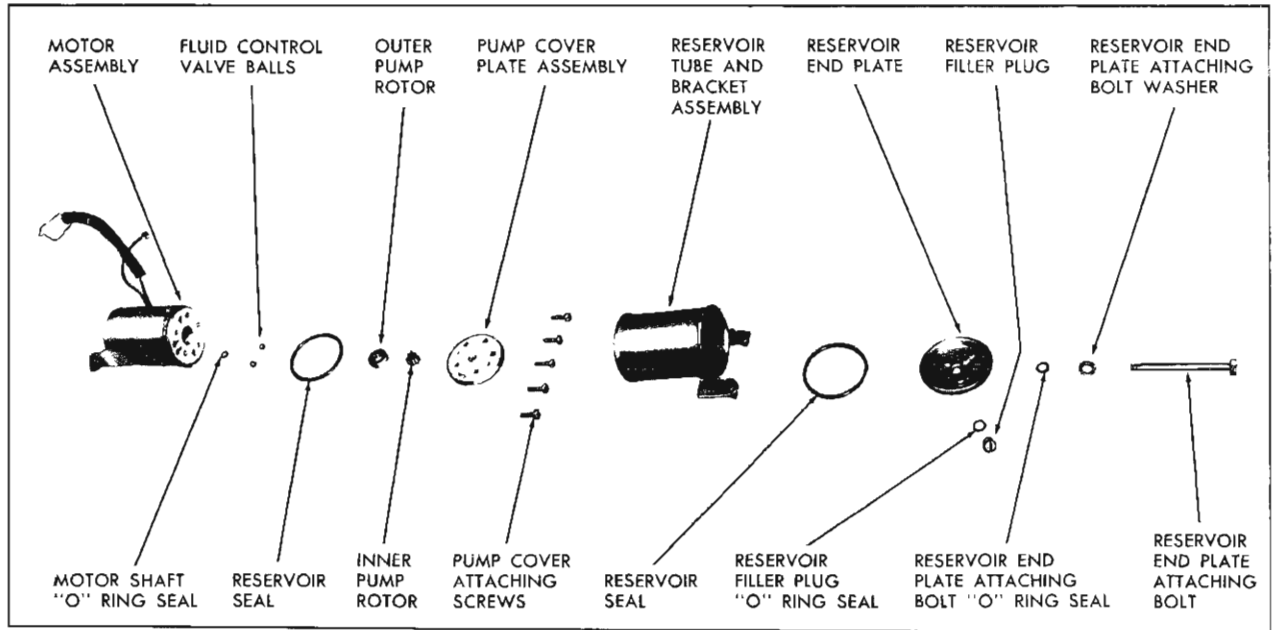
Hydro-Lectric Motor and Pump Assembly—Exploded
